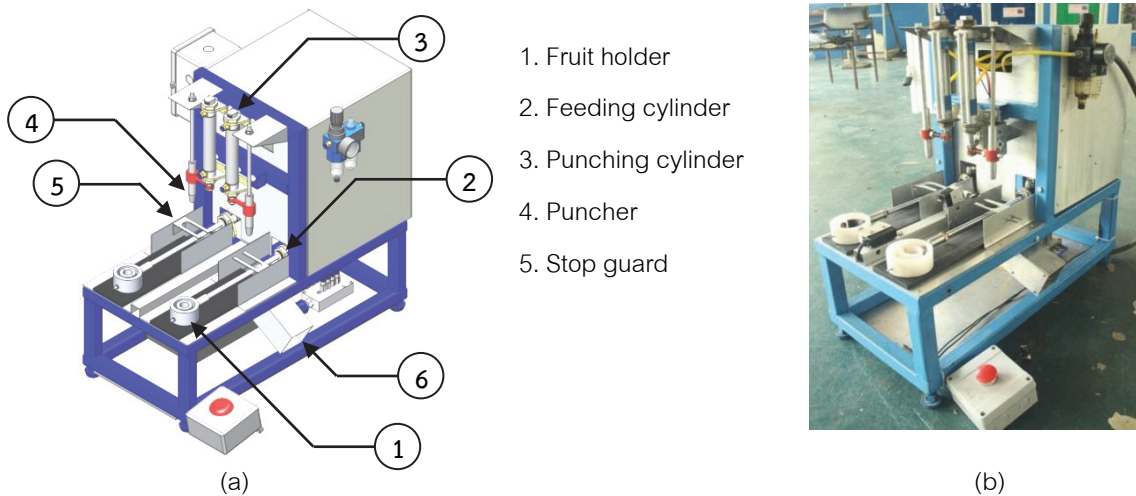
(a) Components of Longan seed removing machine (b) The prototype
